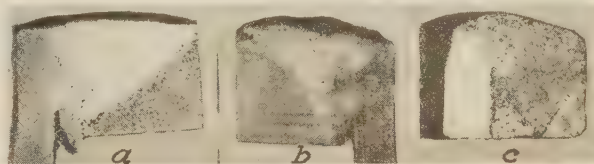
HEAD WELDS SHOWING POOR PENETRATION AND VOIDS (a and b, faults showing on inner surface; c, fault disclosed by cutting.)
